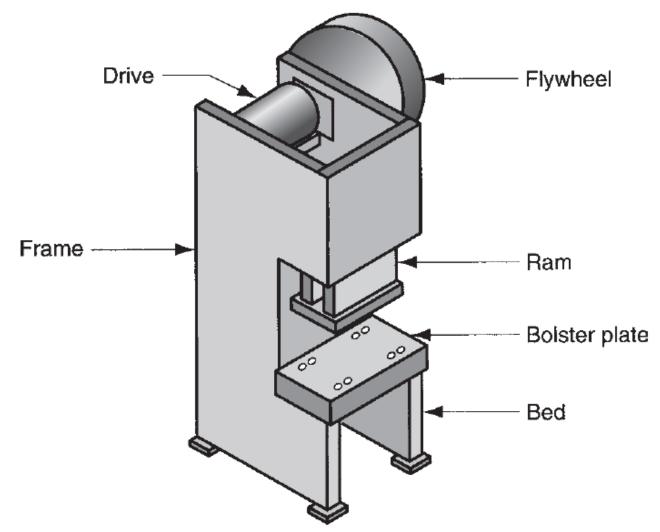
Components of a typical (mechanical drive) stamping press.
